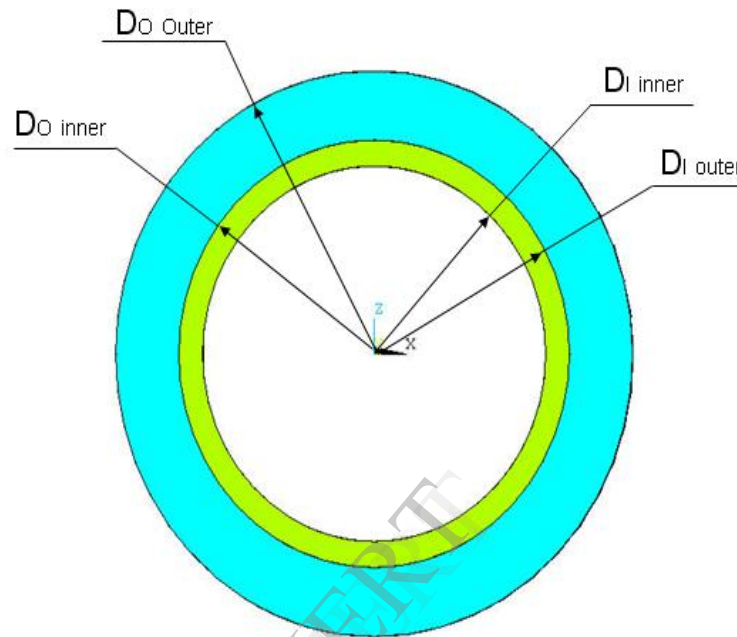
Dimensional Representation of Scroll Hub & Bearing
